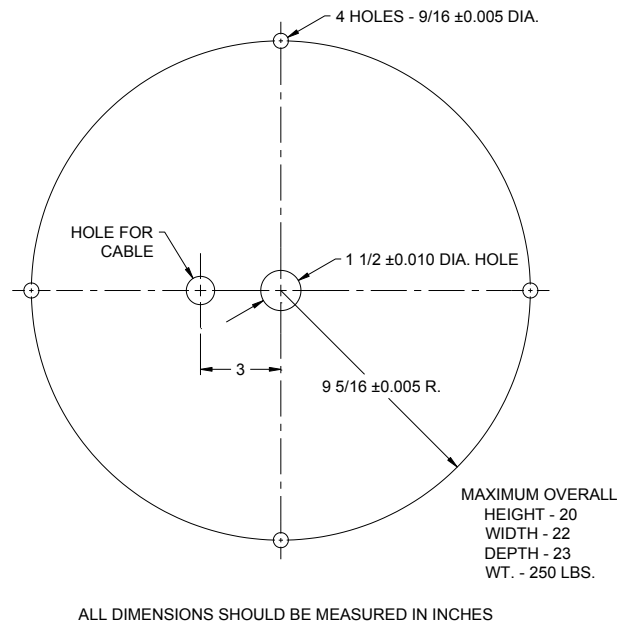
Mounting dimensions for LS 397()/SIC.
